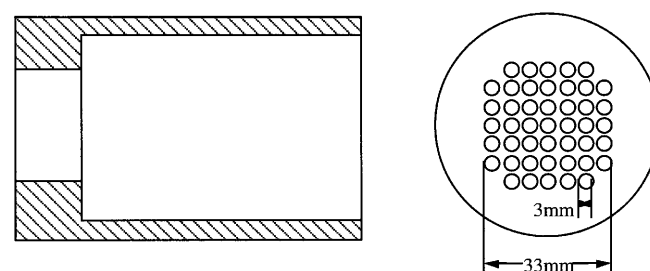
Dies: *left* – single-hole die (sectional plane: axial); *right* – multi-hole die (sectional plane: radial)
